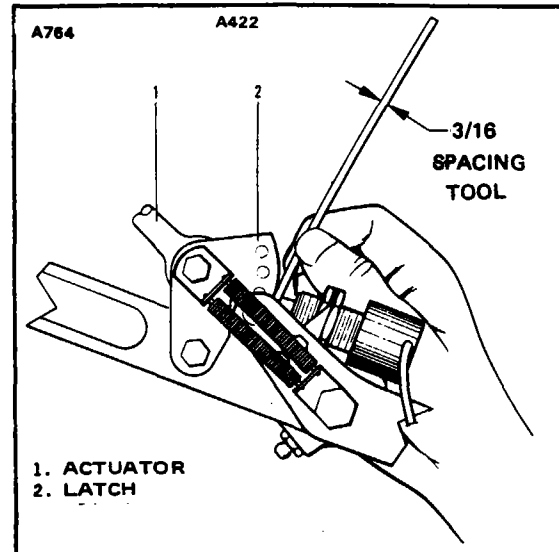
Adjustment of Landing Gear Down Limit Switches
